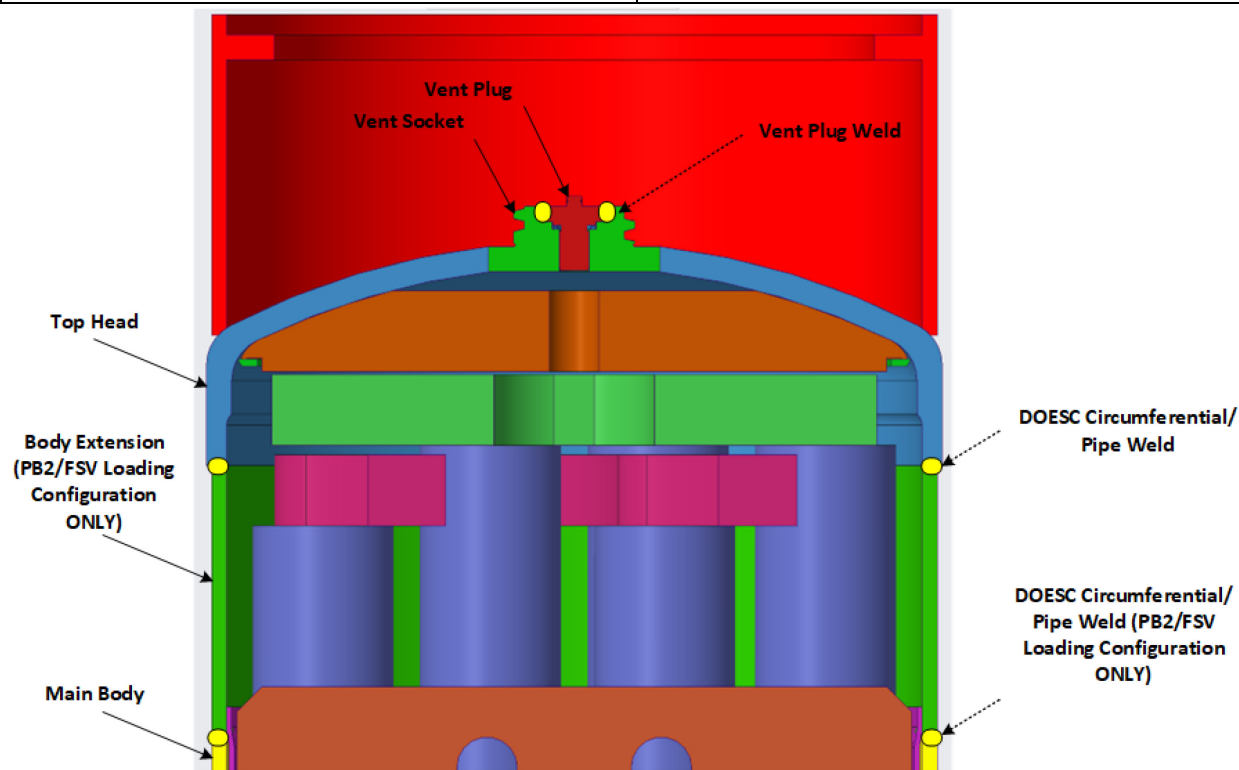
DOESC Closure Welds and Components (diameter mismatch between Top Head and Body Extension is prior to machining)
